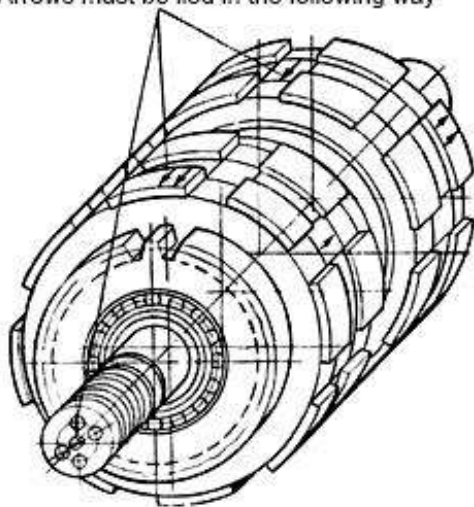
Assembling diagram of secondary shaft and hydropressure clutches of tractor of T-150 type
